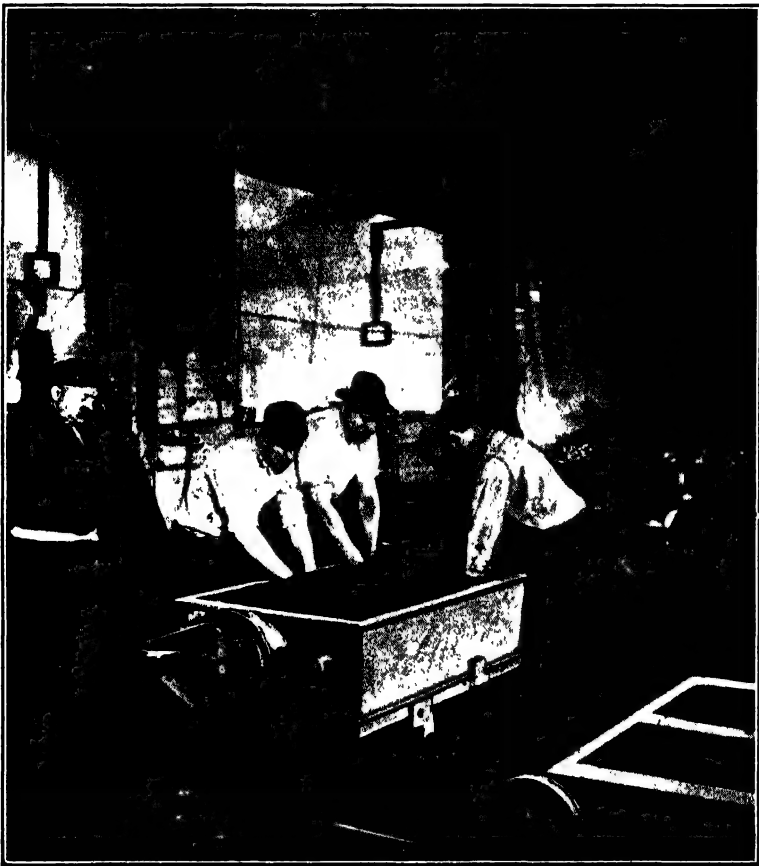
Crank-case molding in a roll-over machine. (Osborn Mfg. Co.)
